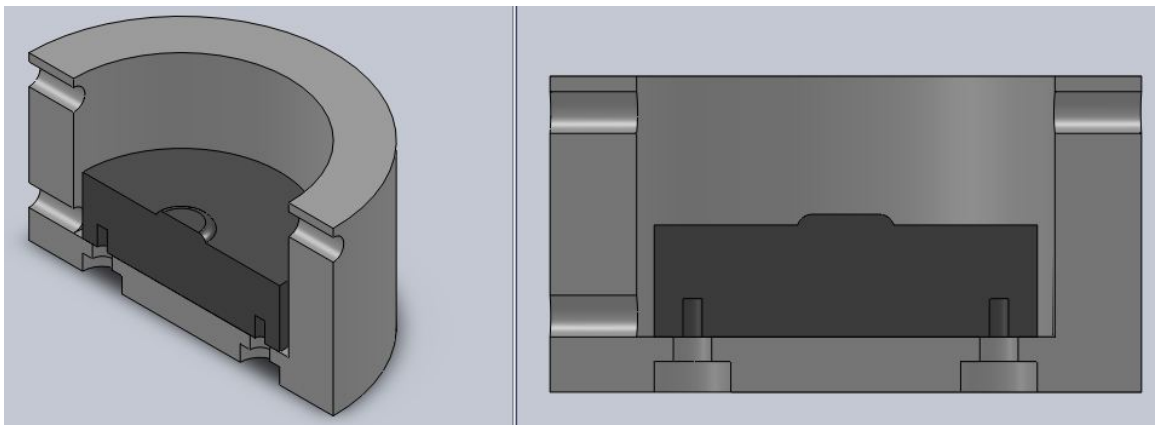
The figure shows the sectional view of the housing unit with the load cell in place.
